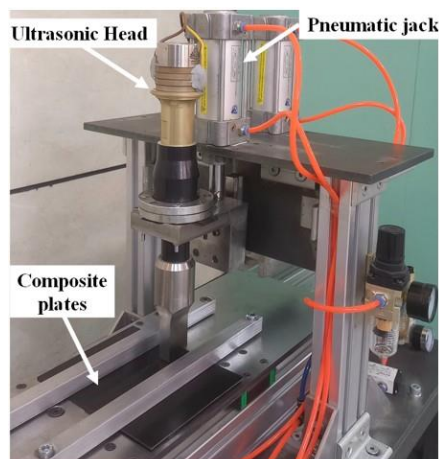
Continuous ultrasonic welding machine and placement composite plates in the fixture.
